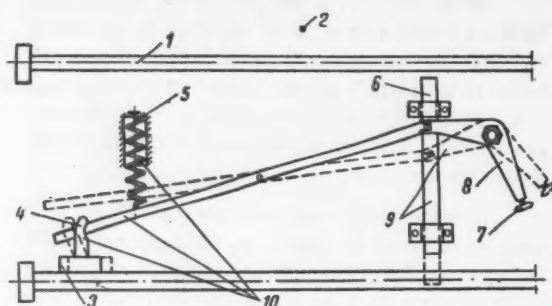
Arrangement for automatic closing of trolleys on freight elevators. 1) Rail; 2) load cradle; 3) socket; 4) lever; 5) spring; 6) closing strip; 7) roller; 8) lever; 9) opening mechanism; 10) closing mechanism.
